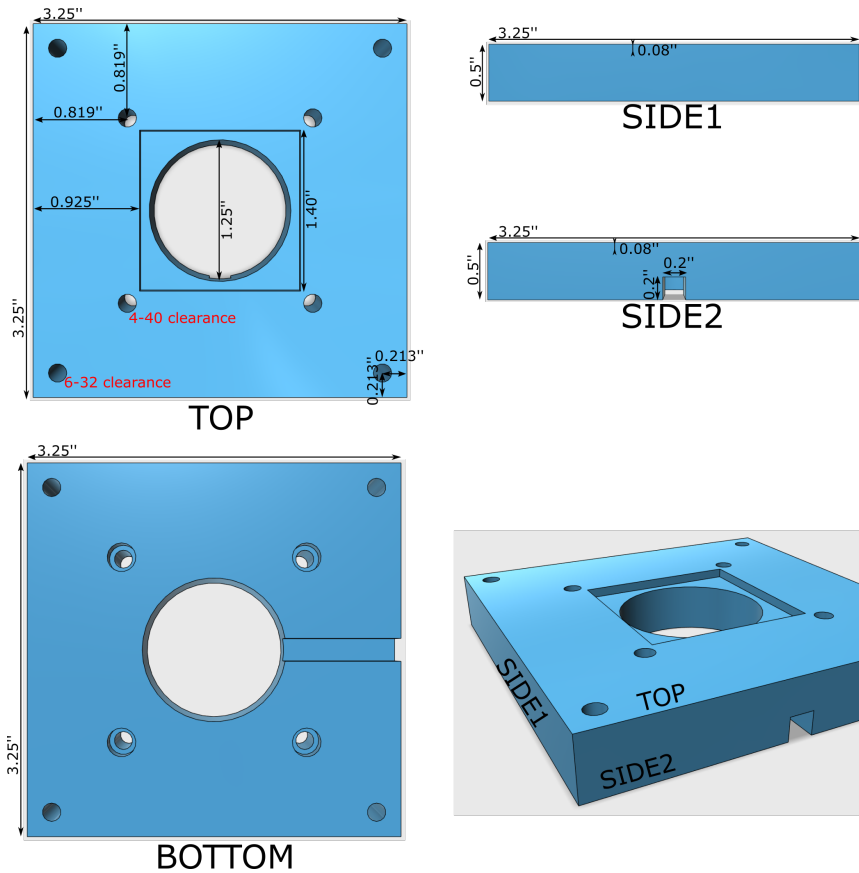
Custom 3D-printed “base” part. 6-32 holes allow mounting of 3D-printed base to the plate. 4-40 clearance holes allow mounting of base to holder. Extra space is removed from these 4-40 holes at the bottom of the base so that when screws are inserted in at the bottom and up further into the holder, the heads of the screws fit neatly into base and the base can still lay flat against the plate. A 1.40” sided square is cut out of the top of the base to depth 0.08” so that a 1/16” thick square of acrylic (McMaster Carr Optically Clear Cast Acrylic Sheet) can be epoxied in. The vial sits on top of this acrylic. The acrylic is transparent to allow the plate-mounted LED to shine on the bottom of the vial. A trench runs from the center of the base to side2 so as to allow egress of the wires that feed current to the LED. A neutral density filter with 12.5% transmittance (Lee Filters 211) sits on top of the acrylic to reduce intensity of LED.
